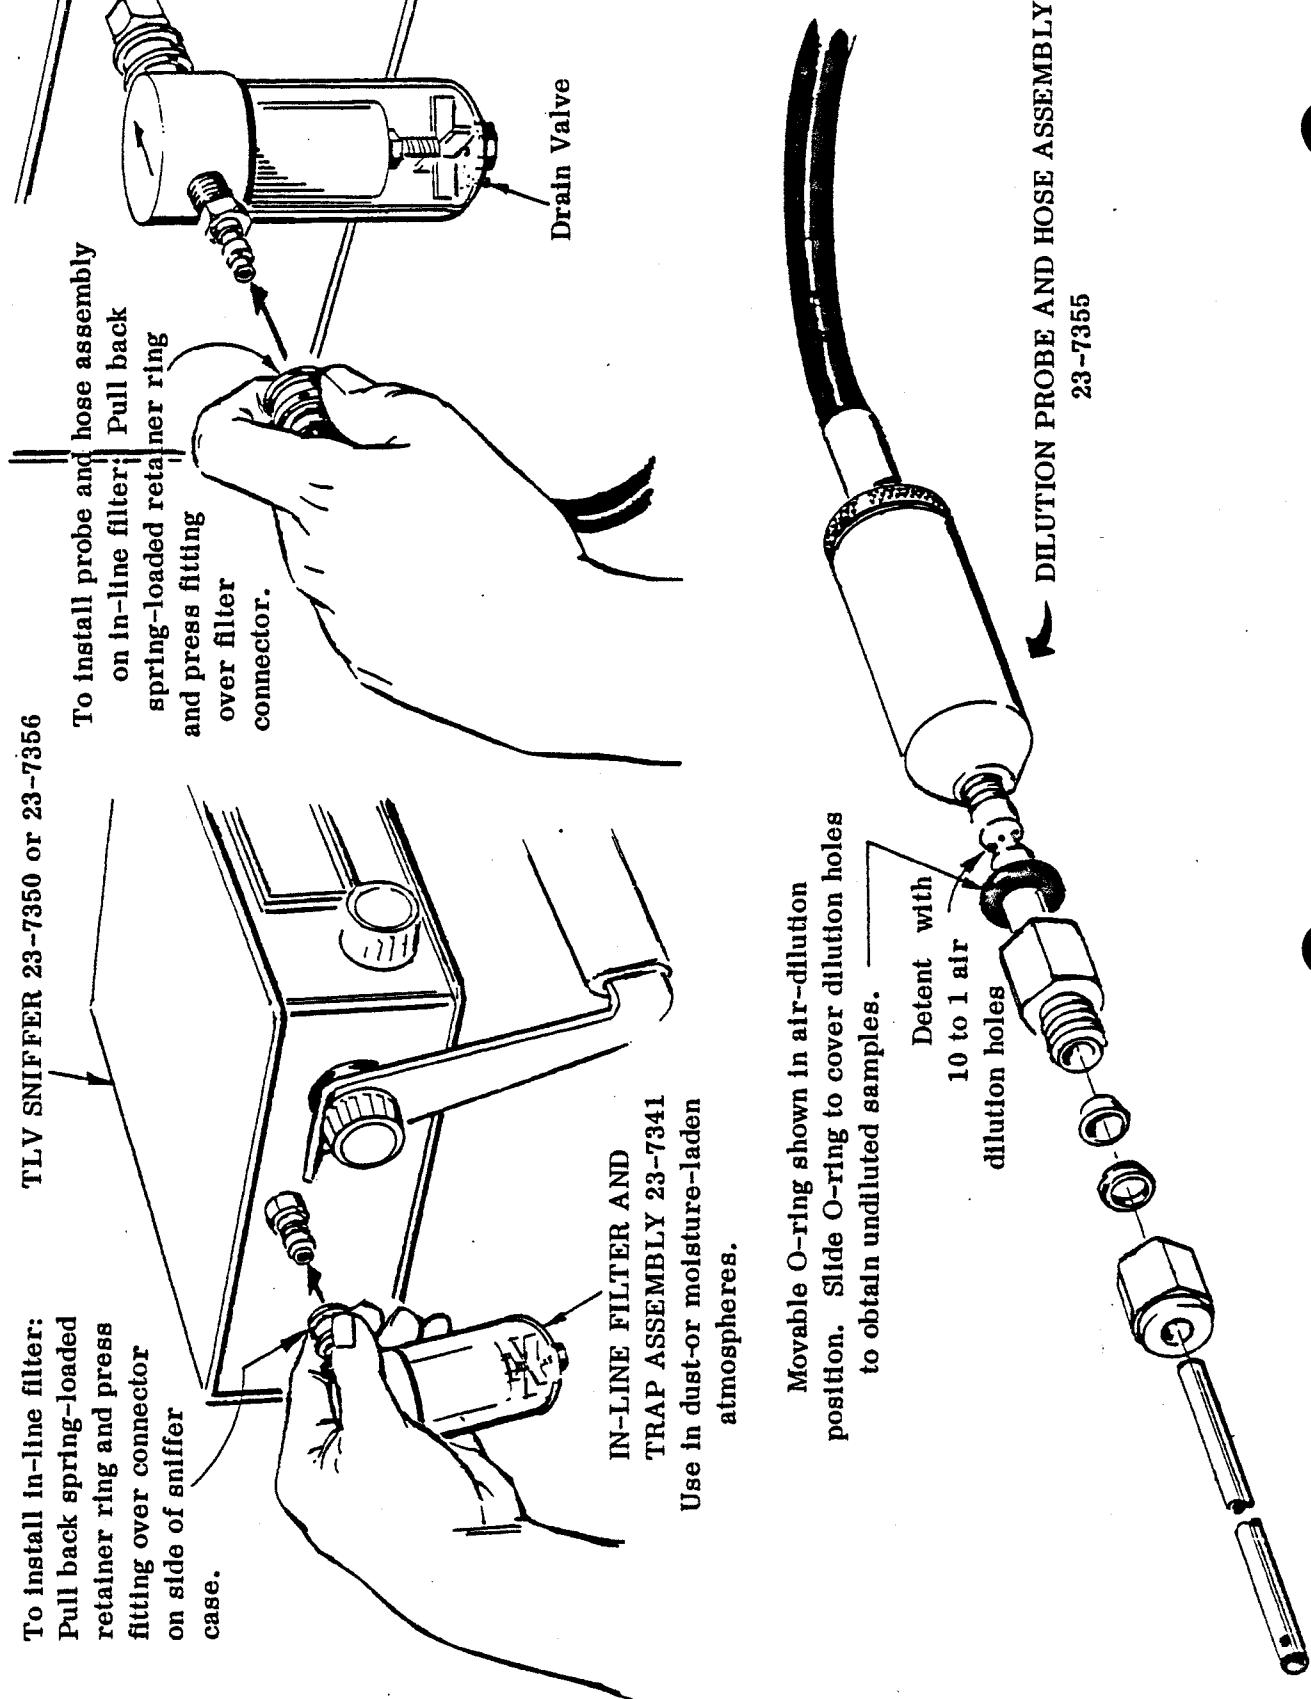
Use of Dilution Probe and Hose Assembly and In-line Filter and Trap Assembly.
